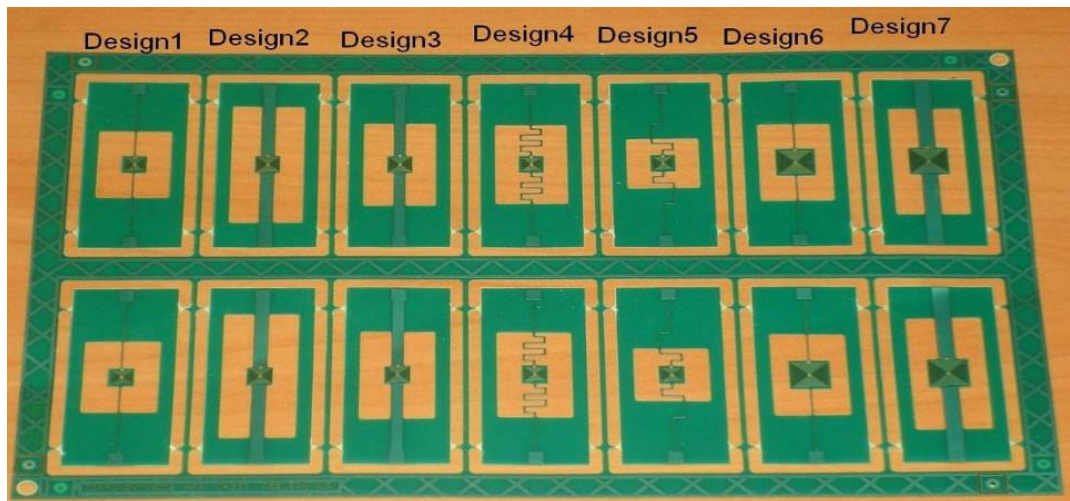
Shows seven different FR4 scanner designs produced on the same FR4 sheet. The FR4 sheet has dimensions of 20cm x 15cm
